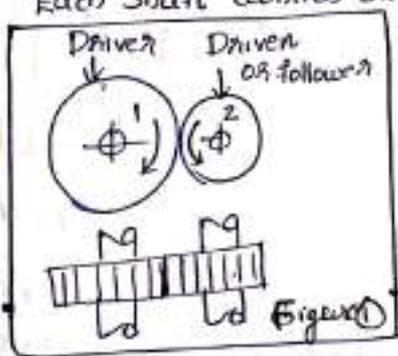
shows Gear 1 drives gear 2. ∴ Gear 1 → driver, Gear 2 → driven (Follower)
